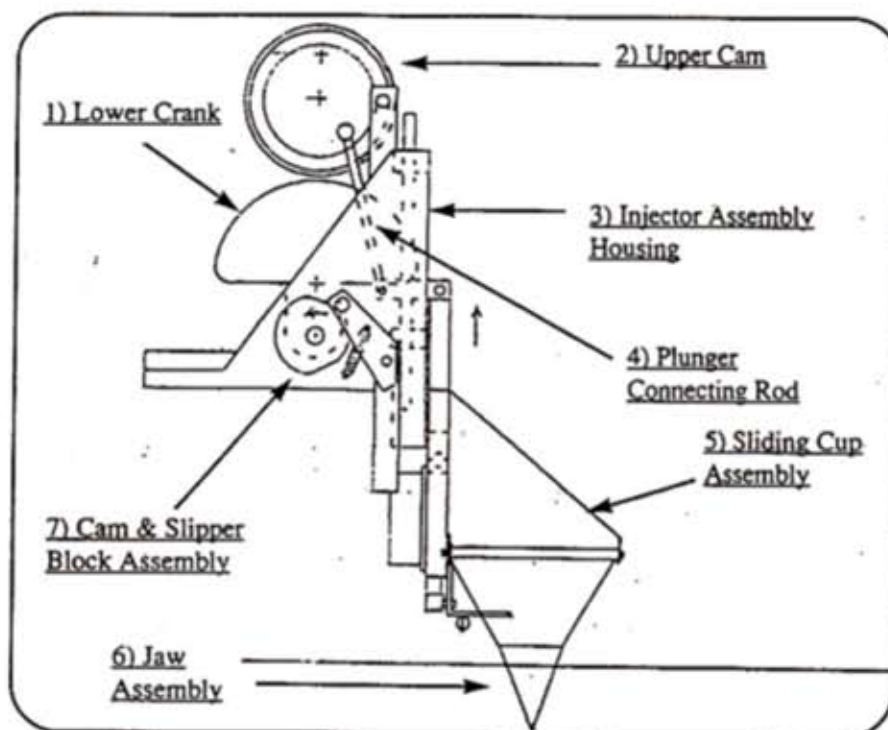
1) Lower Crank 2) Upper Cam 3) Injector Housing 4) Plunger Connecting Rod 5) Sliding Cup Assembly 6) Jaw Assembly 7) Slipper Block Assembly
